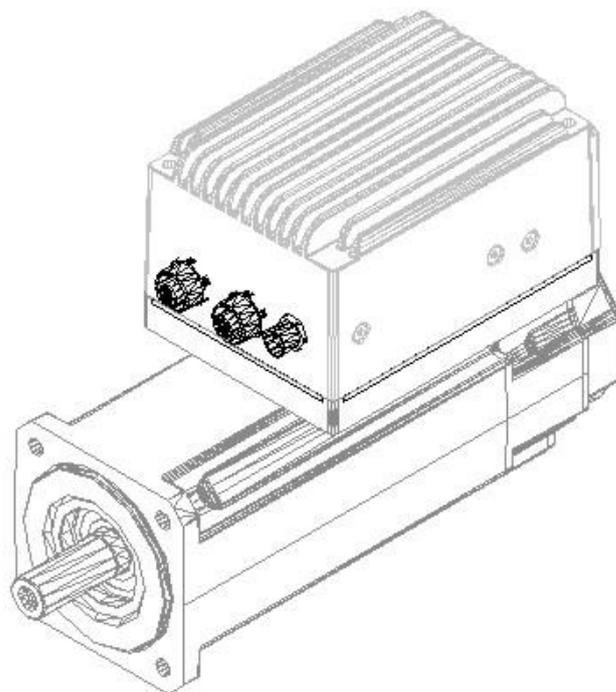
Mounting example without STO – servo drive, mounting plate, motor
